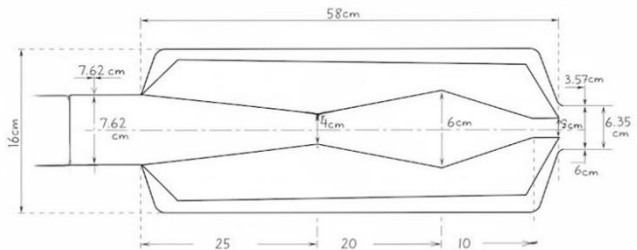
Cross-Sectional View of Exhaust Muffler Design with Dimensions
